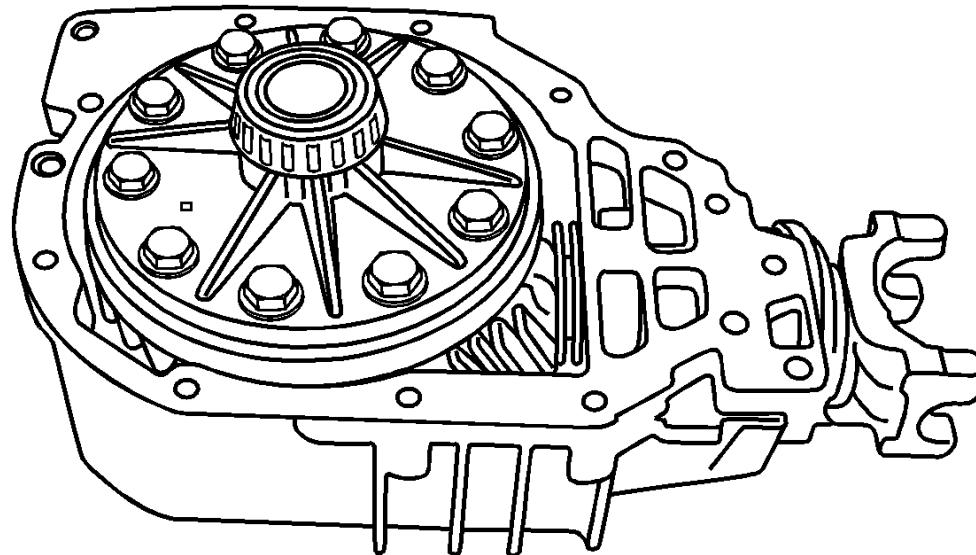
View Of Differential Case Assembly & Carrier Case Half
